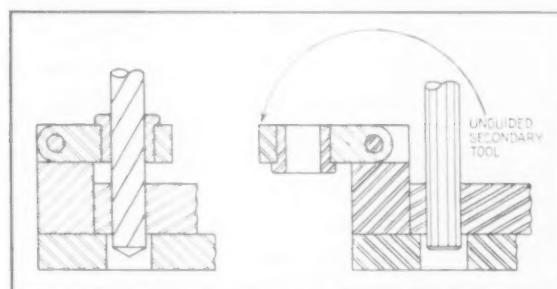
This is a simple example of the use of a secondary tool in a hole which has been drilled using a flipper bushing.
